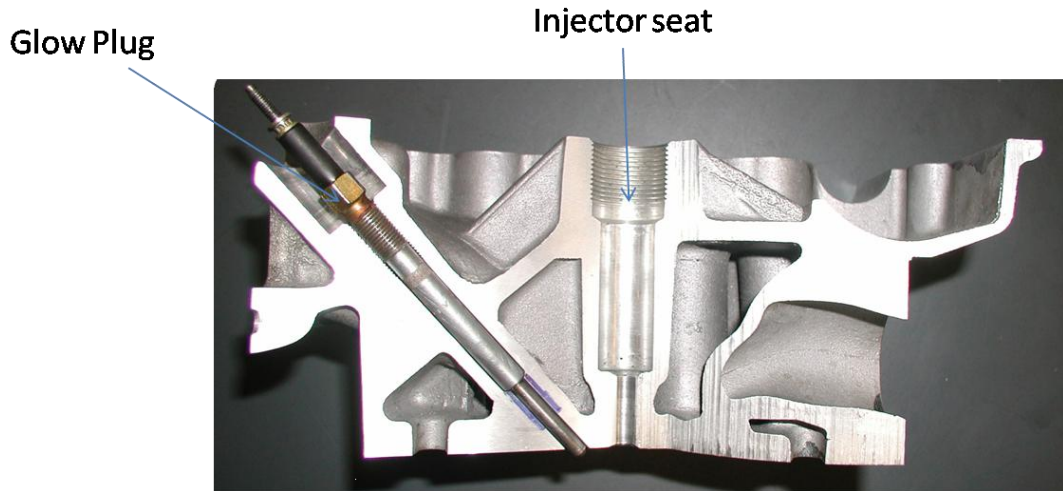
Cut away of cylinder head showing injector seat and glow plug hole
